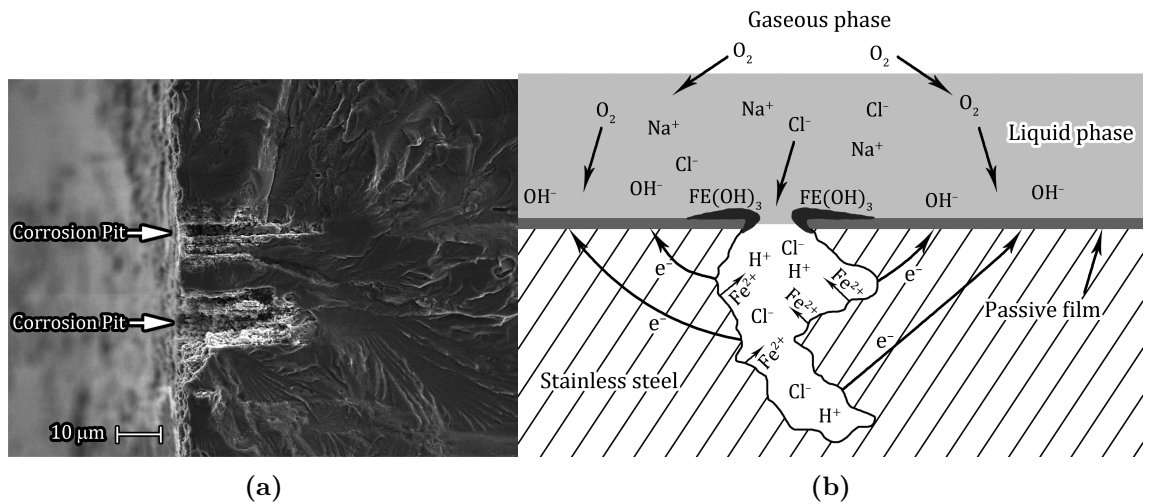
(a) SEM photograph of failure due to pitting corrosion, [27] (b) Diagram of pitting corrosion; [21]
